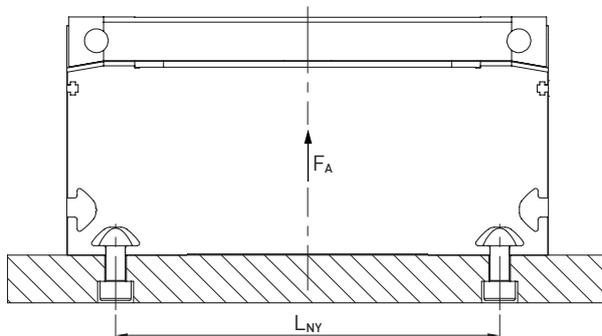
Hole spacing for securing the linear axes HT150, HT200 with a T nut from below
